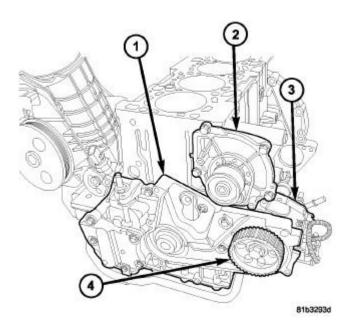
OIL PUMP COVER ASSEMBLY Courtesy of CHRYSLER LLC
